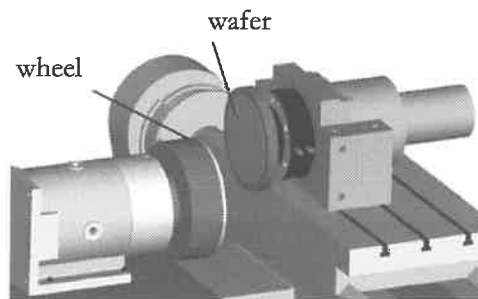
Close-up view of instrumented spindle used in diamond grinding of silicon.
